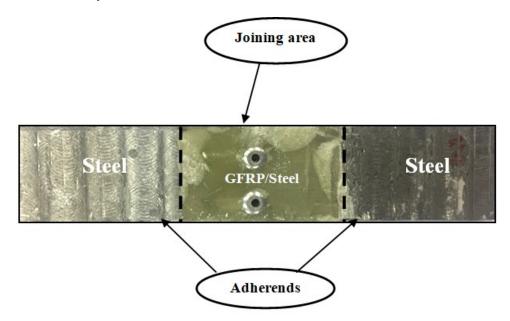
Hybrid joints of adhesive and mechanical fastening (rivet).
